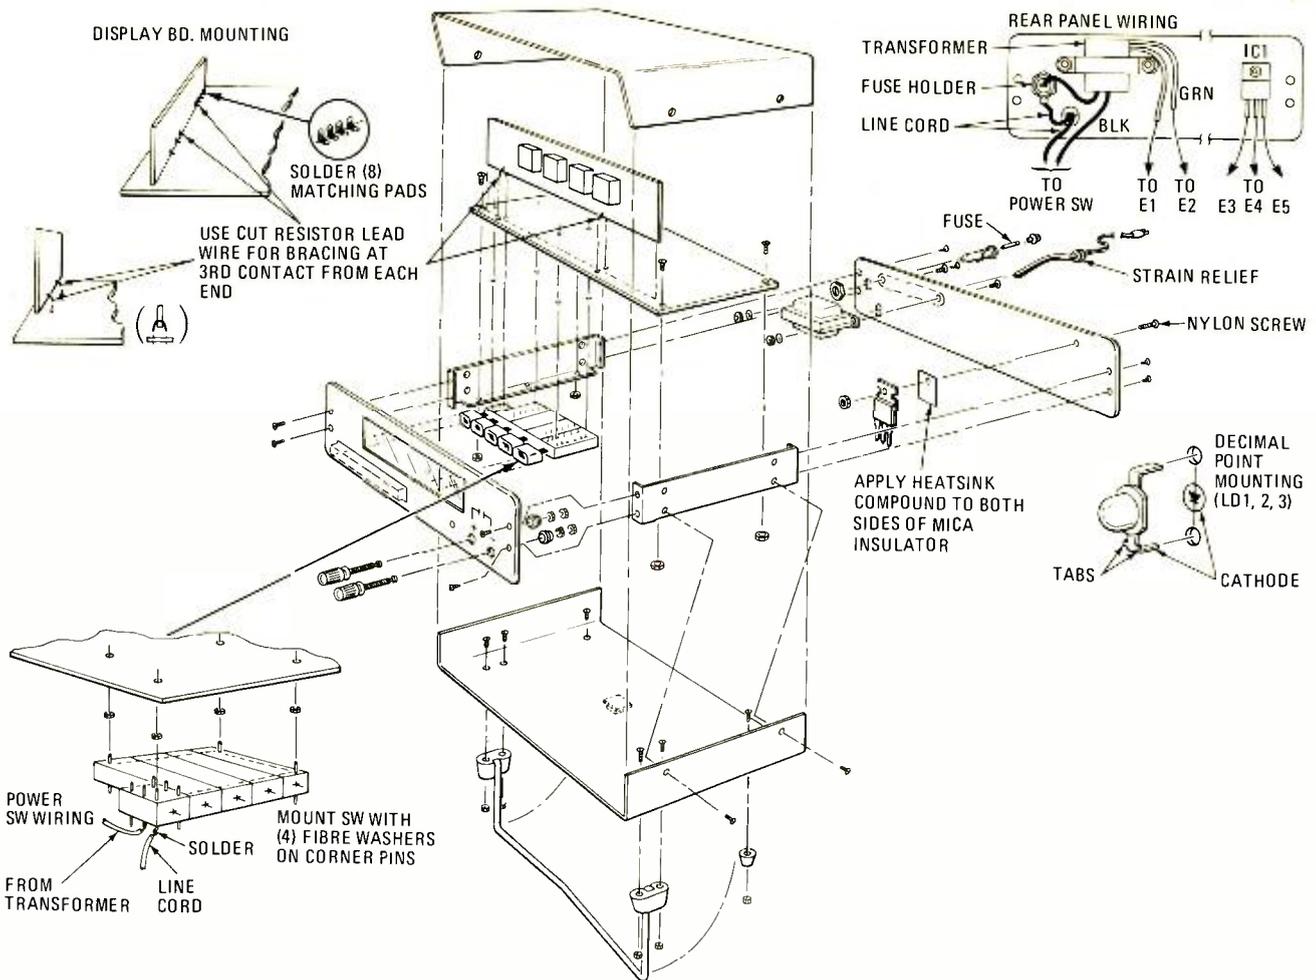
EXPLODED VIEW of the model CM-1000 digital capacitance meter. Parts are as supplied in the kit. Use this as a guide if you build your meter from scratch.
